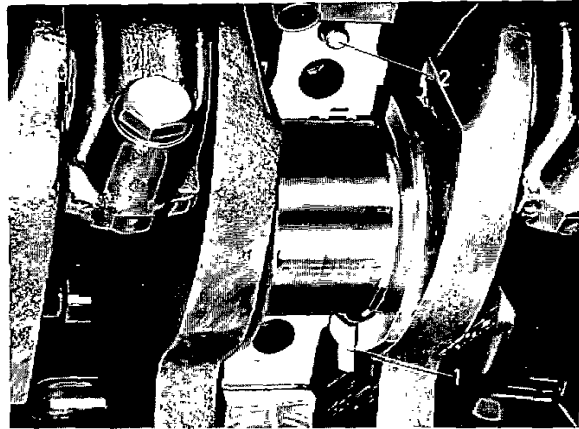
Pilot slot (1) and locating pin for main bearing cap (2)
